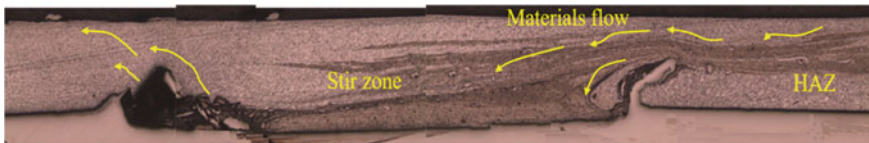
Optical image of weld cross section at pin diameter of 4 mm
